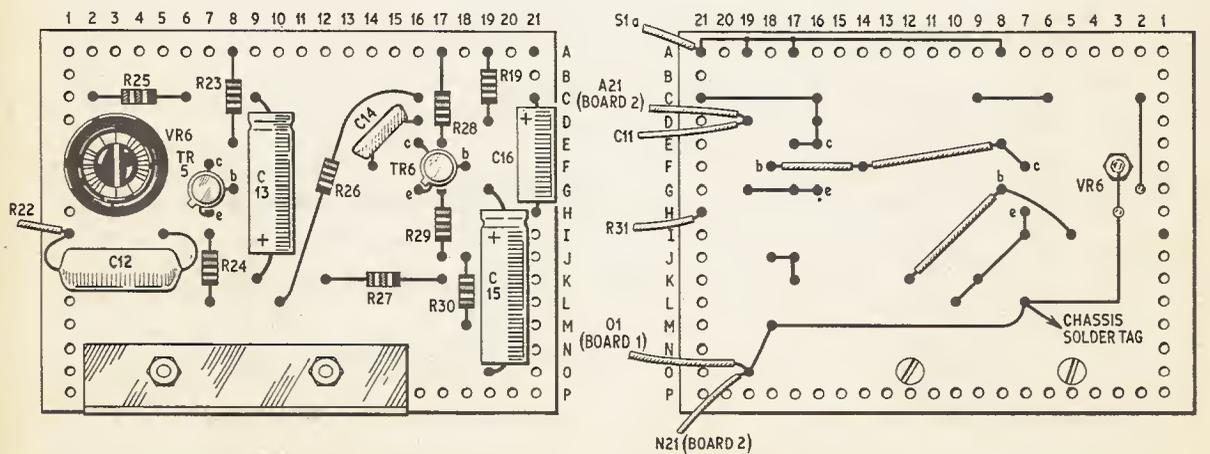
Component layout and wiring for Board 3, comprising the mixing amplifier
